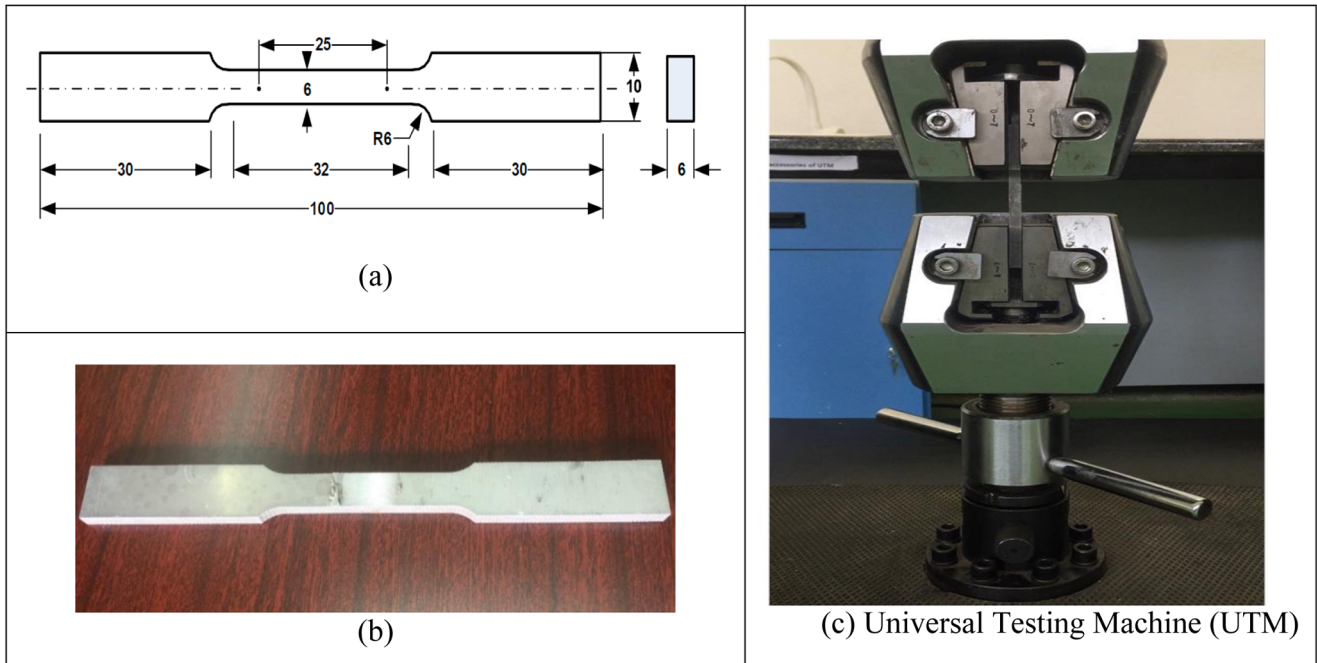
(a) Schematic diagram of the ASTM E8/ E8M standard tensile test specimen. (b) Photograph of FSWed tensile specimen. (c) UTM.
